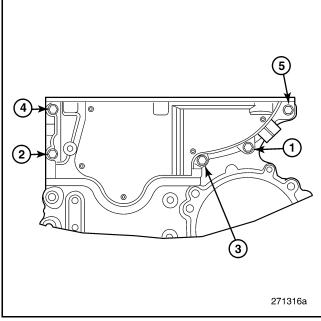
Timing Gear Cover Fasteners Torque Sequence
